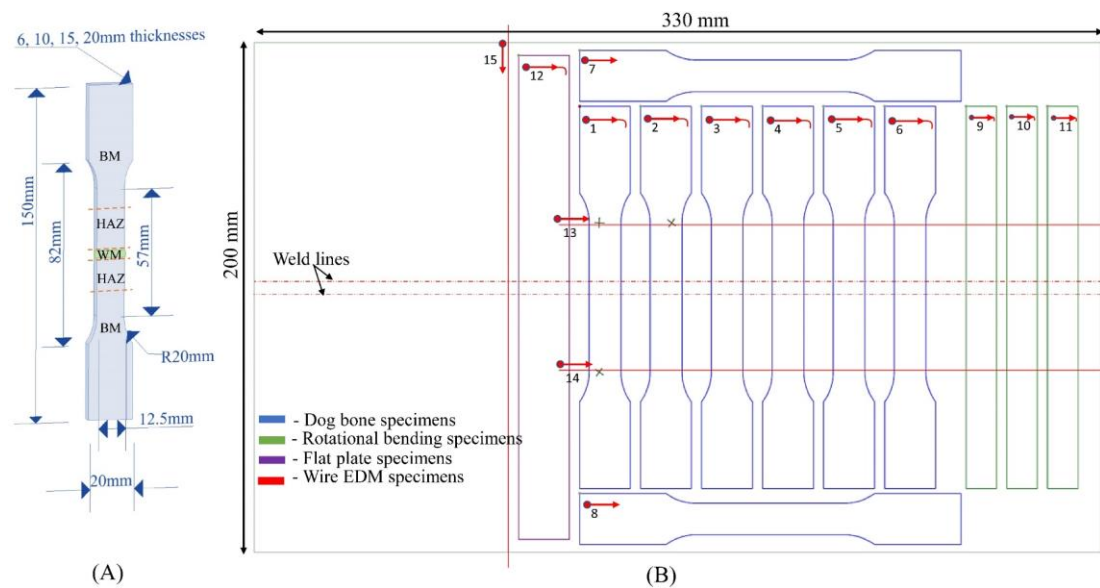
a) Tensile and fatigue test specimen dimensions, b) Waterjet cutting sequence.
